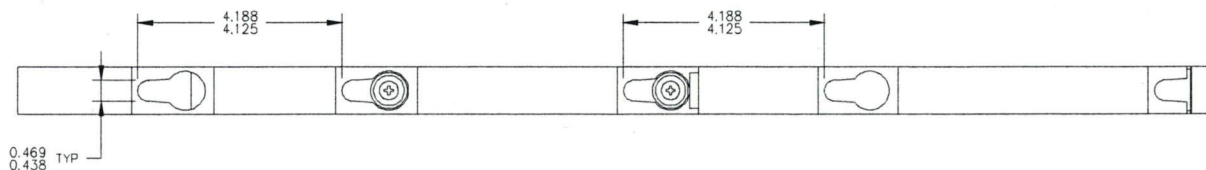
Critical Keyway Dimensions (Forward Beam)
